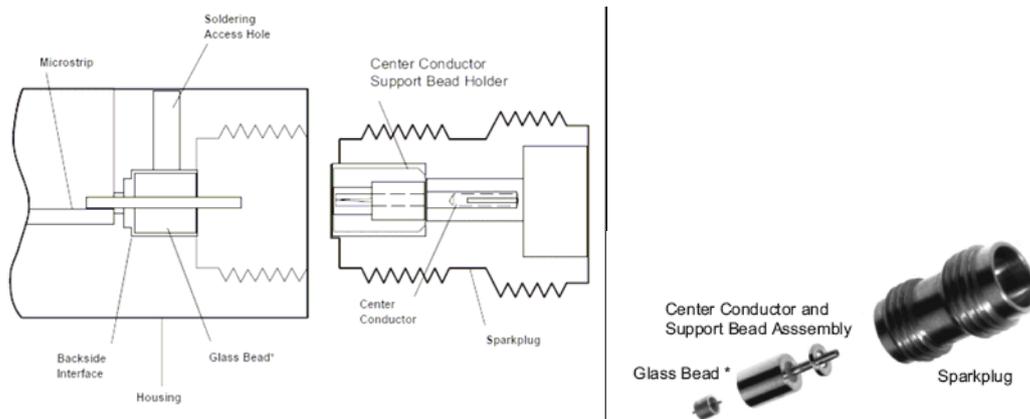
Sparkplug assembly and unassembled V102F Sparkplug connector.
